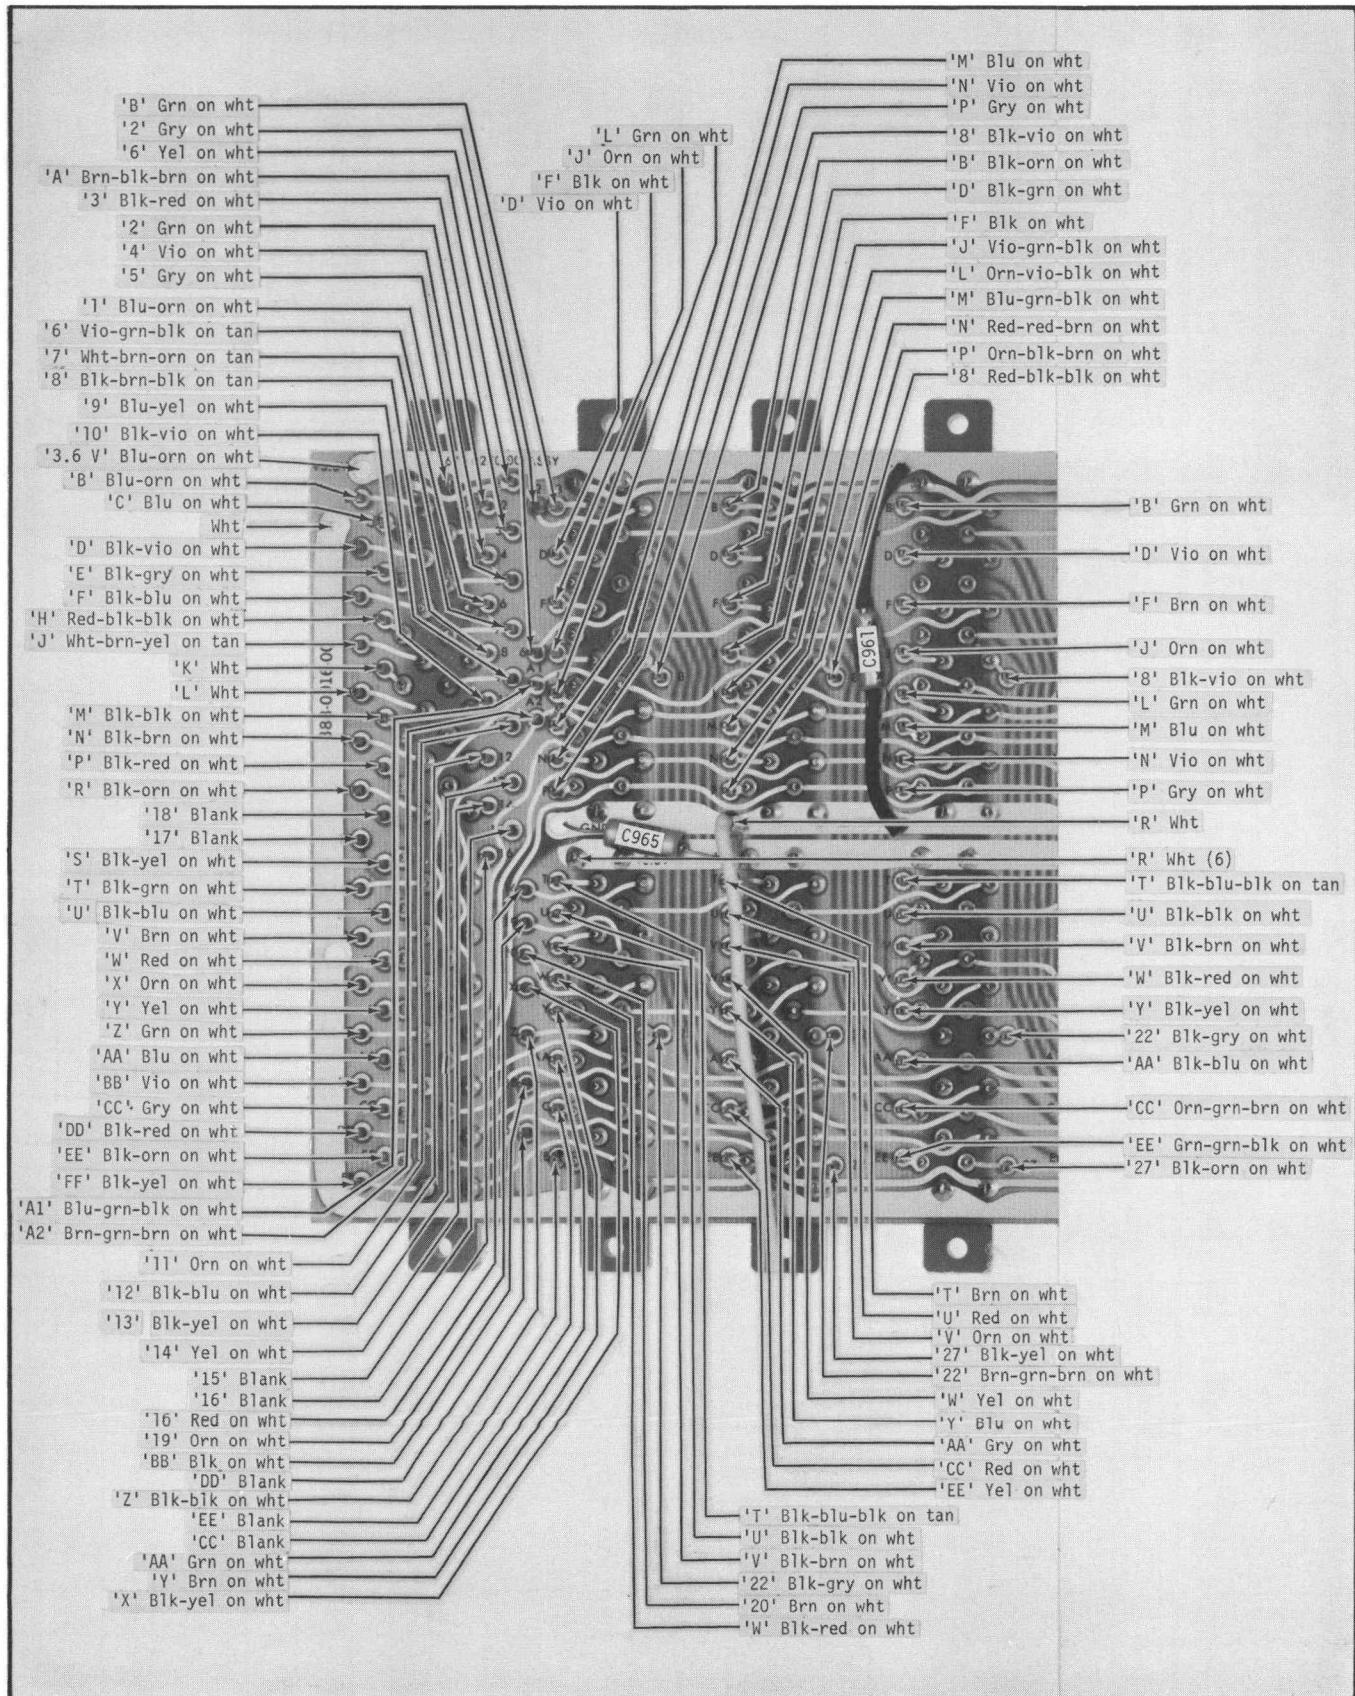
Partial interconnector circuit board showing component location and wiring color codes.
